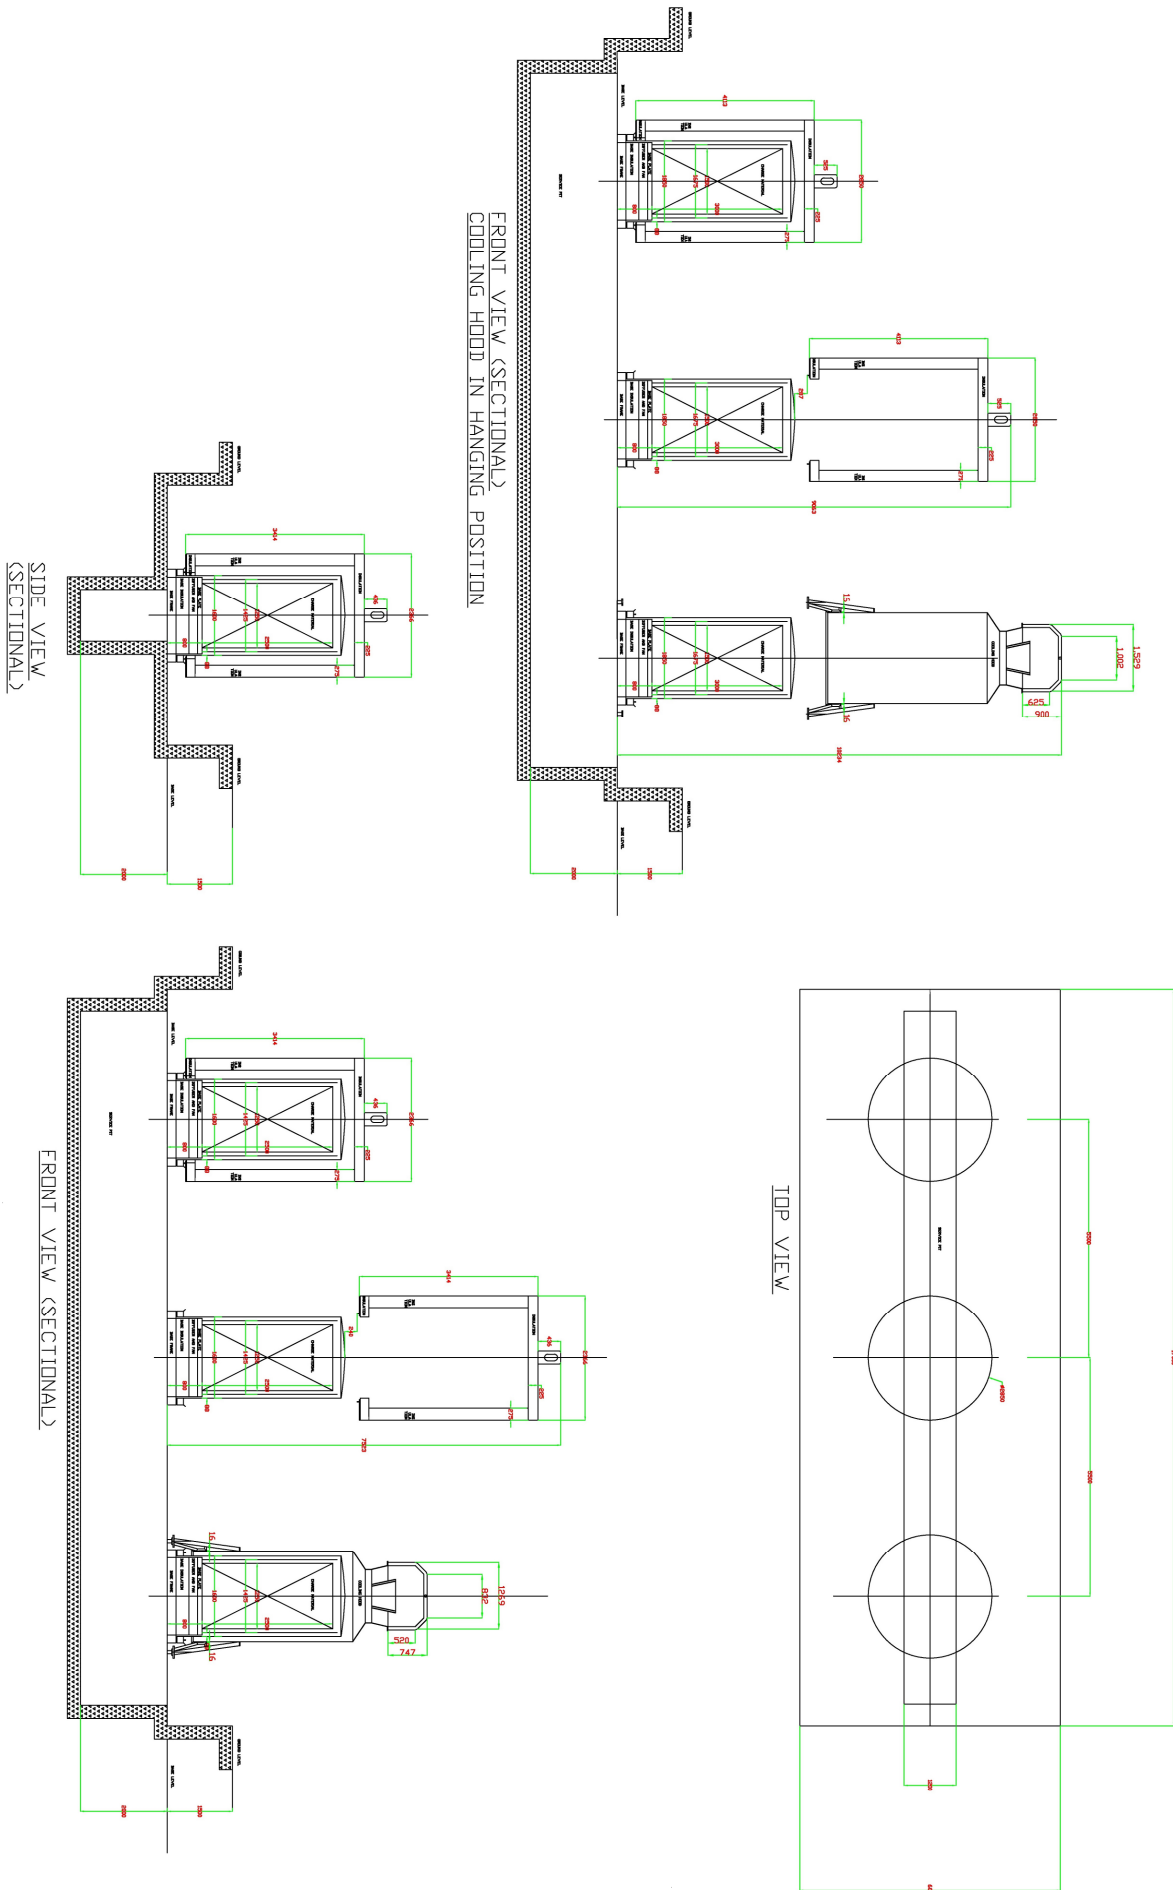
Optimal design dimensioned drawings [28]. Courtesy of Prolific Engineers.
